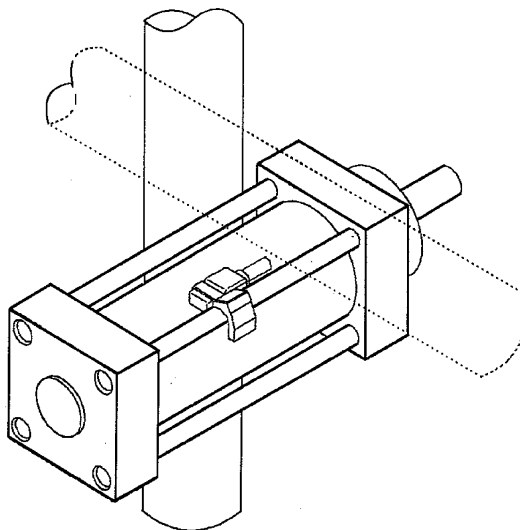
Relative location (1) of Switch and Welder cable
